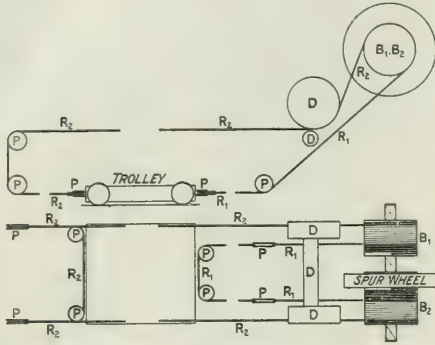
DIAGRAM SHOWING TRAVERSING ROPE ARRANGEMENT FOR HAMMER CRANE.
